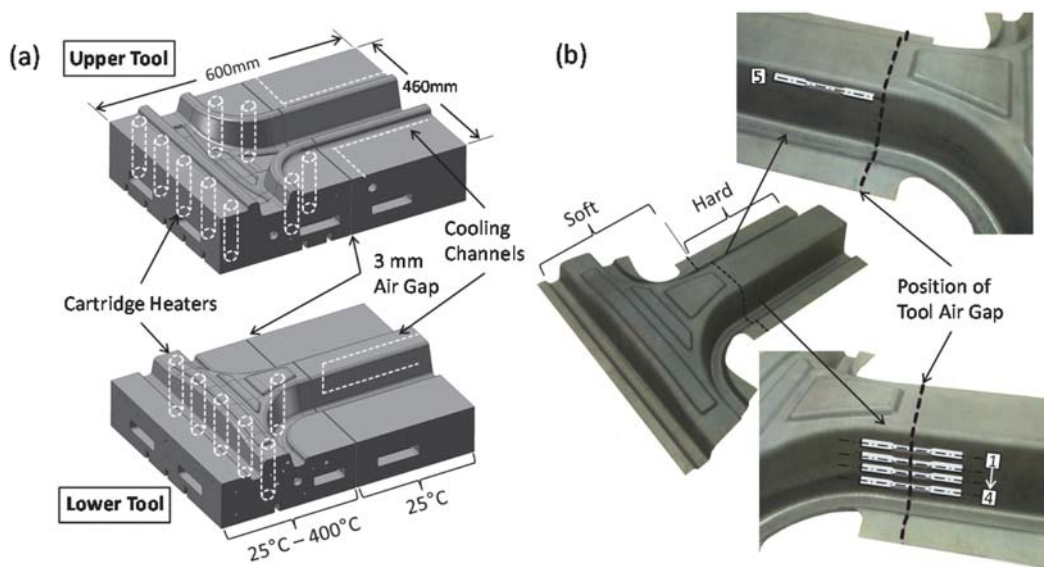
(a) A CAD image of the heated/cooled hot stamping die set (b) A photograph of a hot stamped part with the transition zone specimen locations highlighted. The dashed line indicates the location of the 3 mm air gap in the tool which represents the middle of the transition zone.
